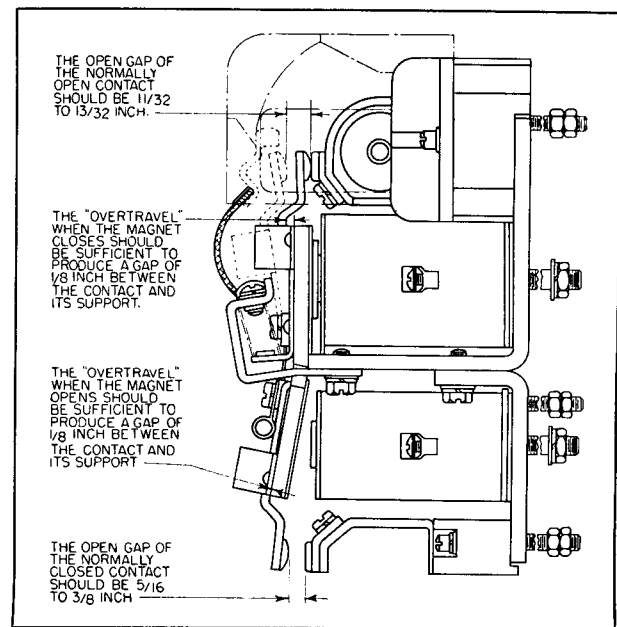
Partially Cut-away View of Type M-211-2H Contactor
